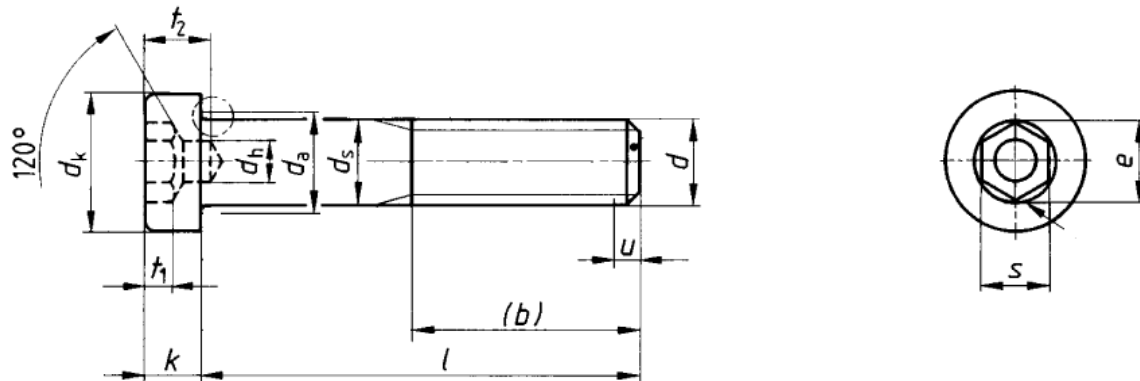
Hexagon Socket Thin Head Cap Screws DIN 6912
